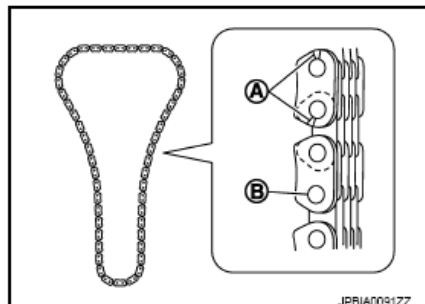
Checking Timing Chain For Cracks And Excessive Wear
